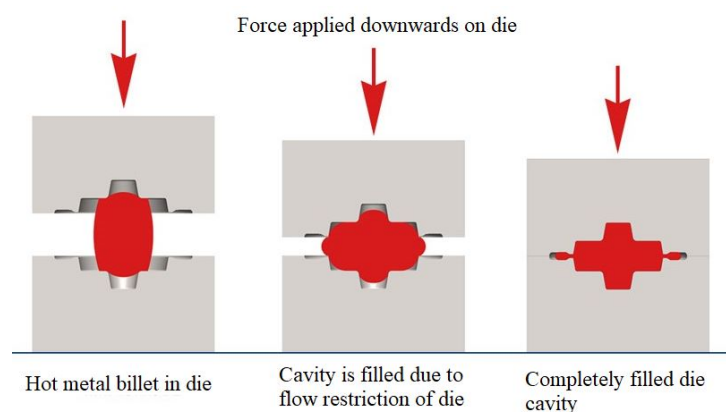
Demonstration: forging of hot metal billet in the hot-die forging process
